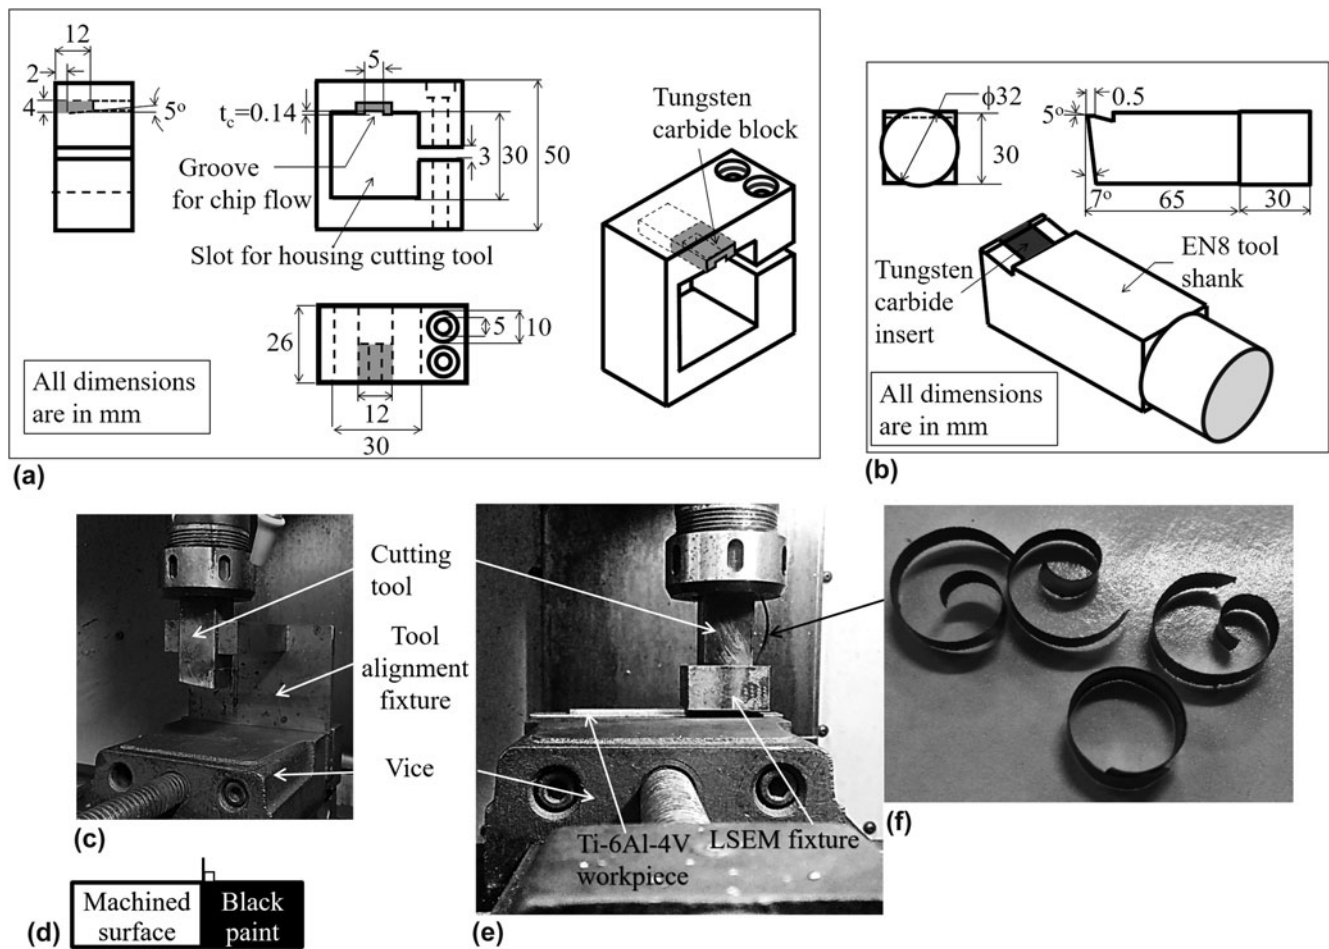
(a) Fixture for implementing large strain extrusion-machining, (b) schematic of the single-edge restricted-contact cutting tool. (c) HAAS milling machine setup with tool alignment fixture. (d) Verification of tool alignment using a quick stop method with the painted unmachined surface. (e) The HAAS milling machine setup with LSEM fixture and the Ti-6Al-4V workpiece. (f) Raw extruded foils from extrusion-machining process.
